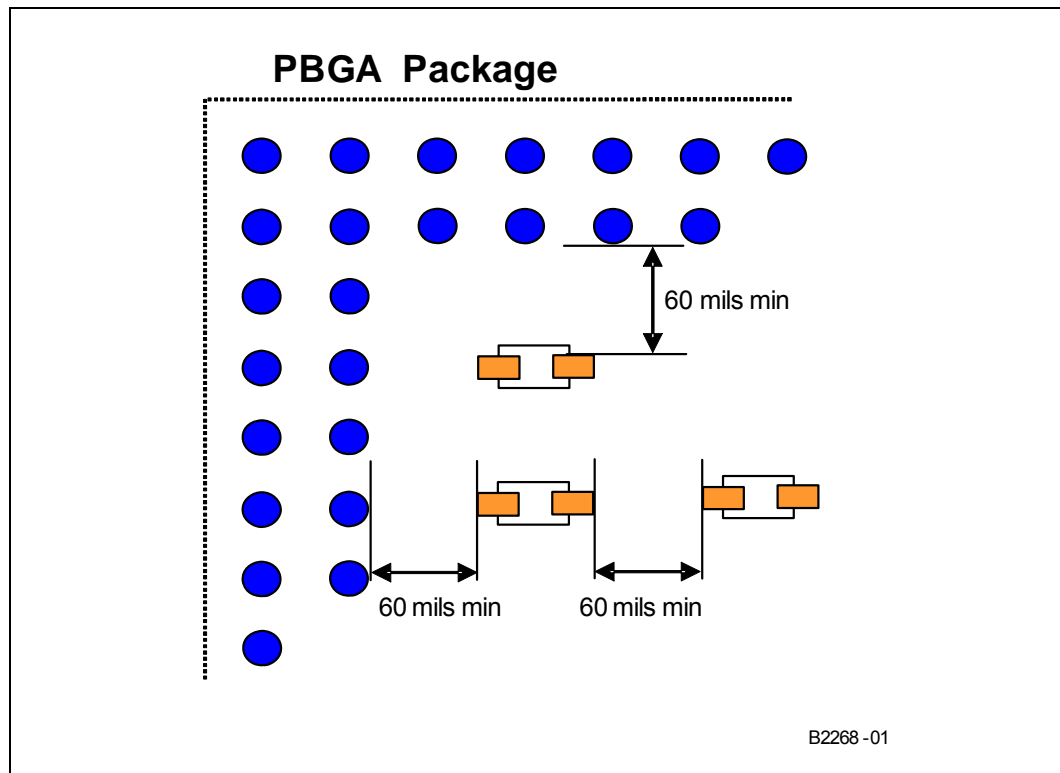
Pad-to-Pad Clearance of Passive Components to a PGA or BGA
